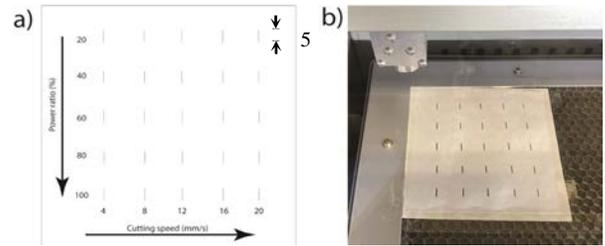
(a) Illustration of Laser Cut Design (b) Laser Cutting Process.
